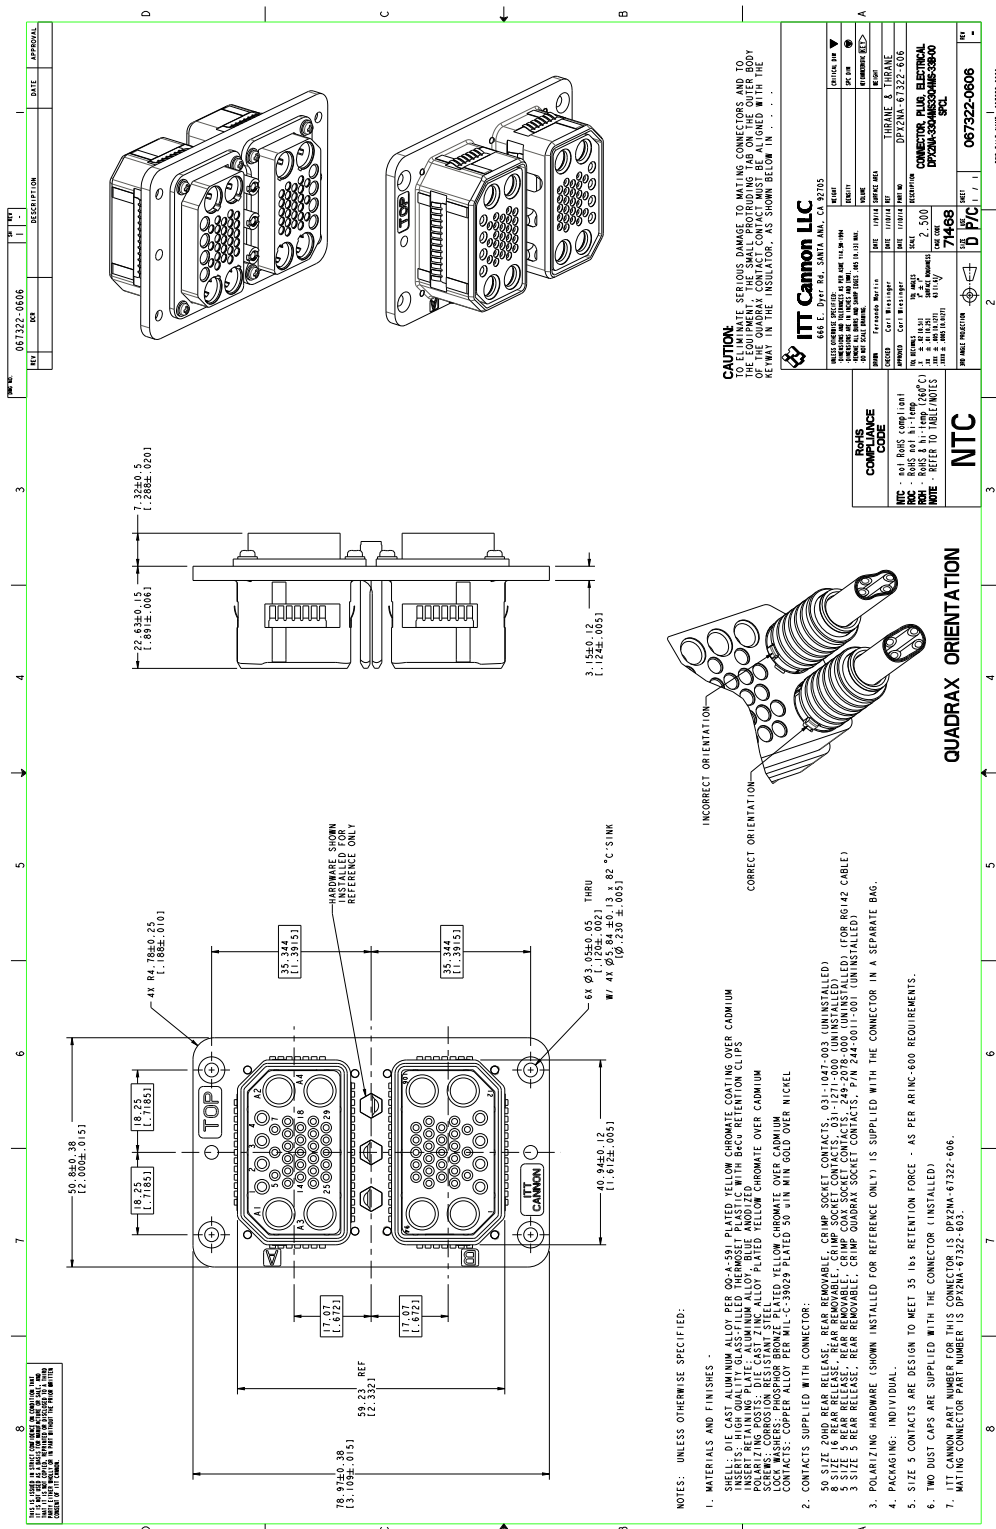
Outline drawing: SBU tray connector: ITC Cannon DPX2NA-67322-606
